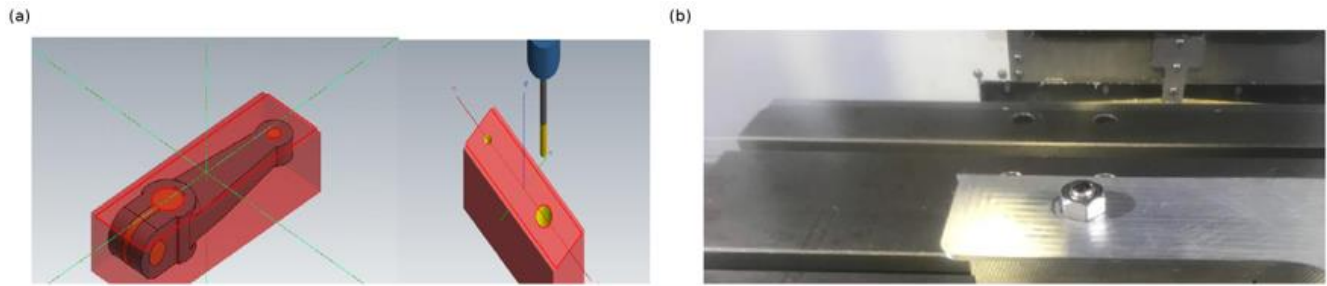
Machining stages of the clamp-type linkage arm: (a) CAM simulation of the hole-machining operation on the first side and (b) reverse-side setup using a threaded fastener after the primary contour and locating features had been machined.
